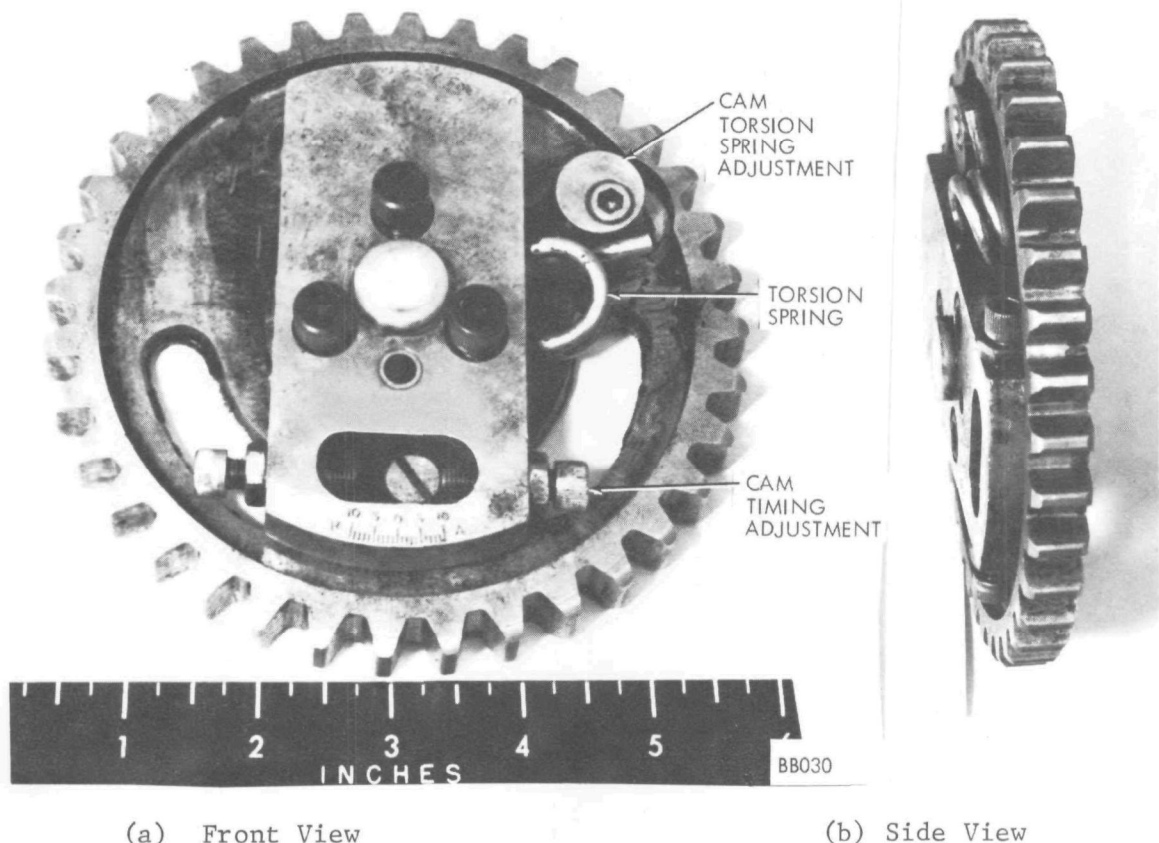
DEVICE 245 VARIABLE CAMSHAFT TIMING GEAR
